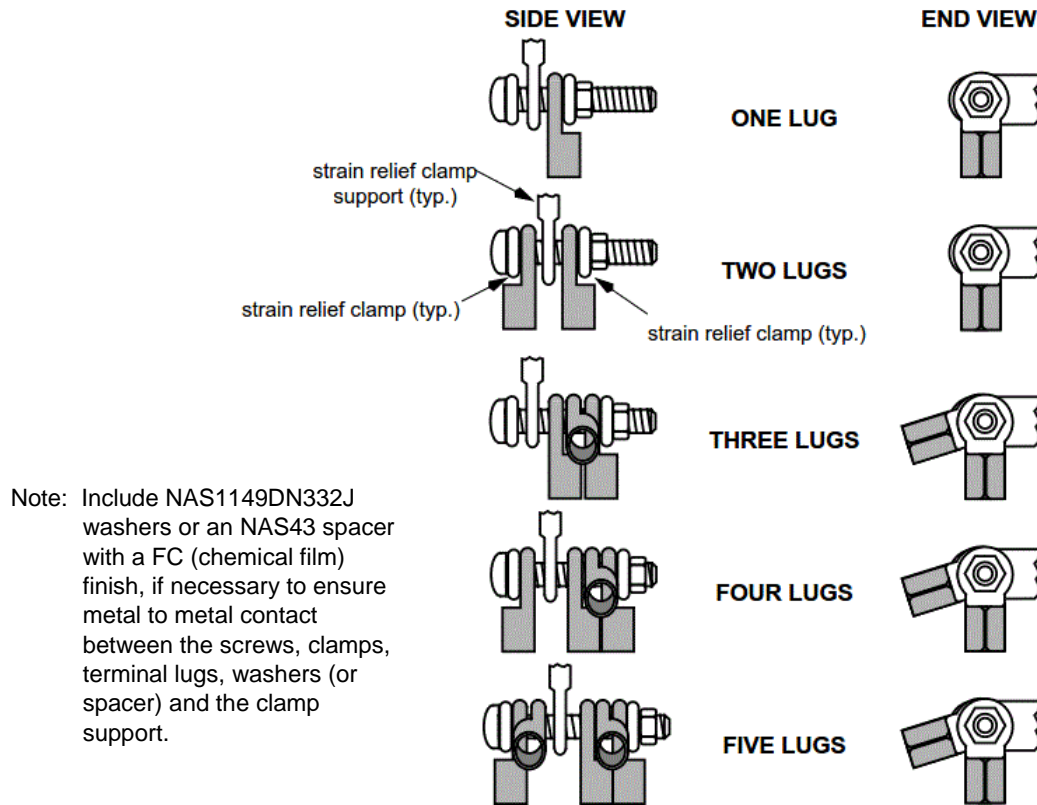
Assembly of Terminal Lugs to Strain Relief Clamps
